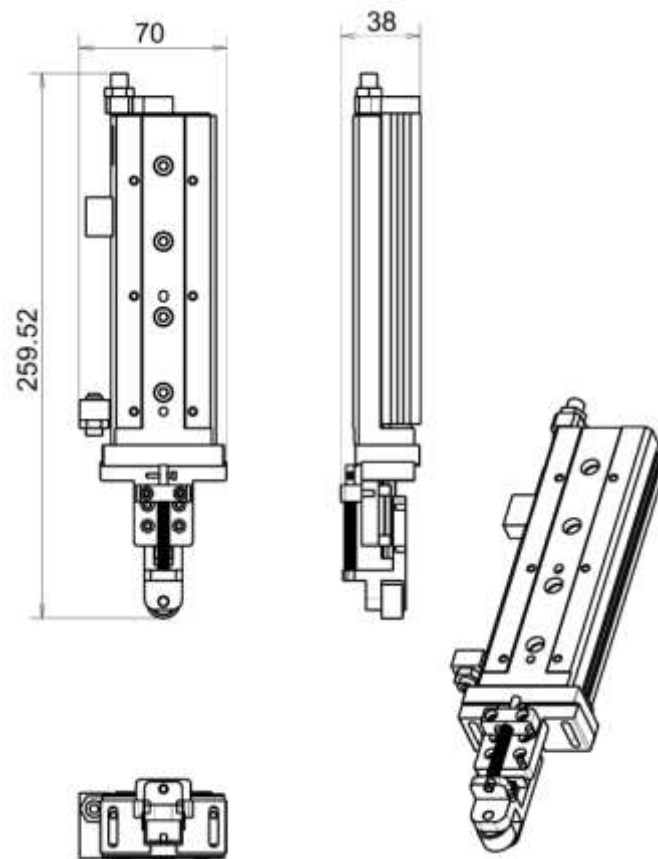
Technical parameters of tape pressing mechanism design 3.
